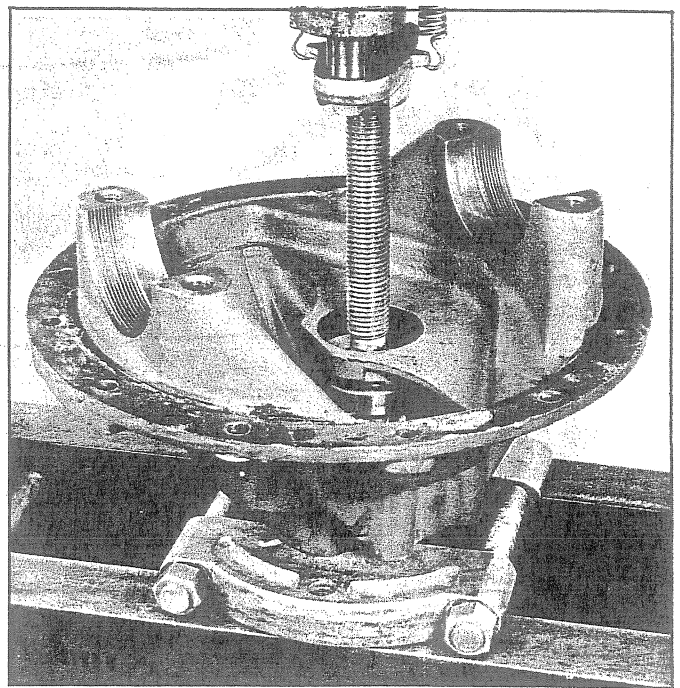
Pressing Pinion Assembly from Differential Carrier
